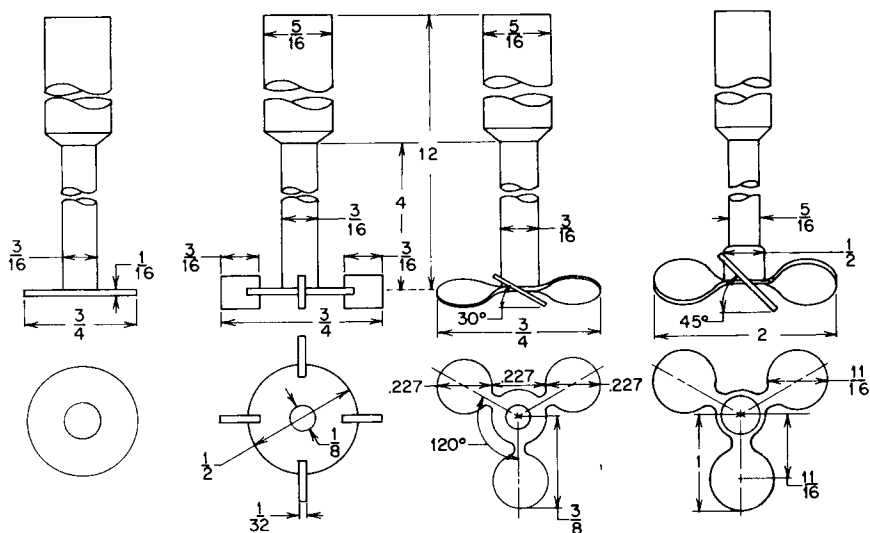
Detailed dimensions of disc, flat blade turbine, and screw propeller agitators. Dimensions are in inches.
